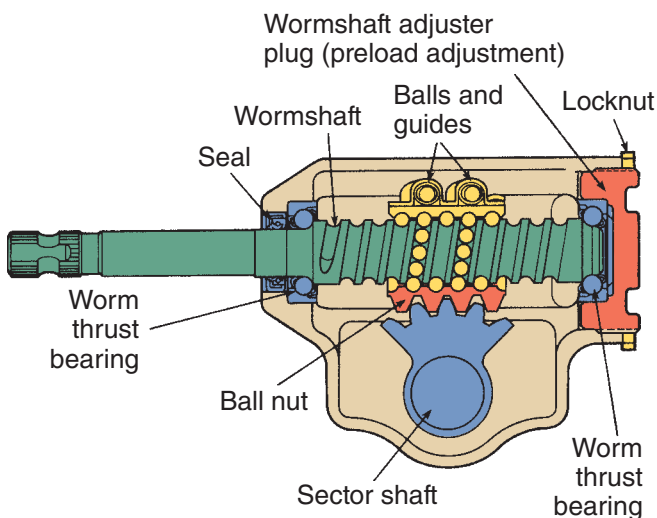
A top cutaway of a manual recirculating ball steering gear.
